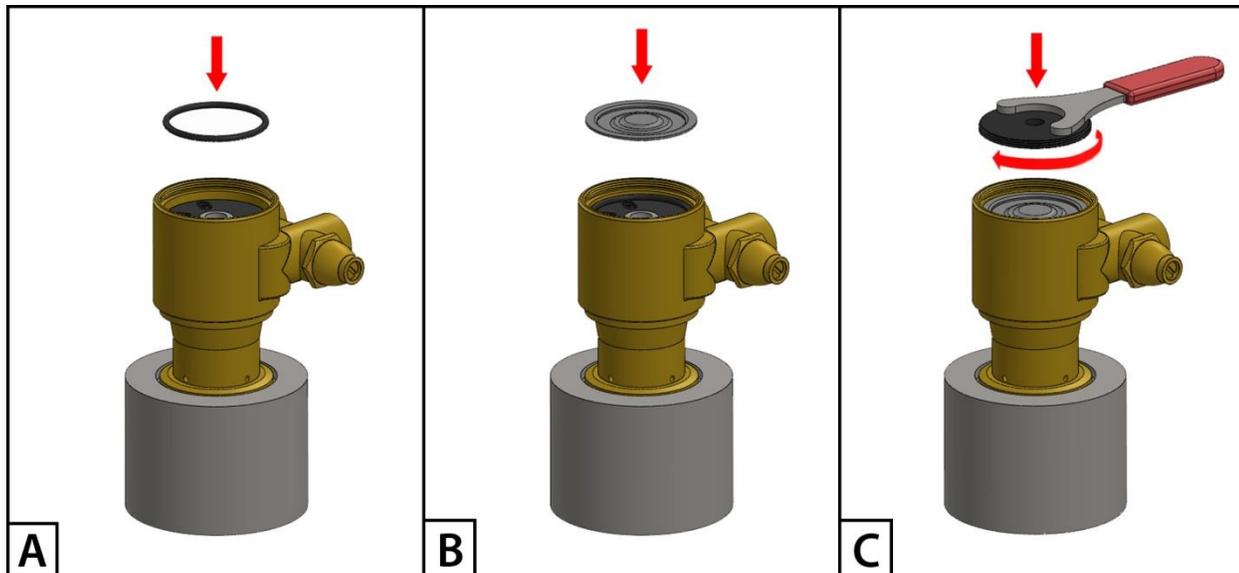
Diagram illustrating the tasks required to carry out Step 5.4.
